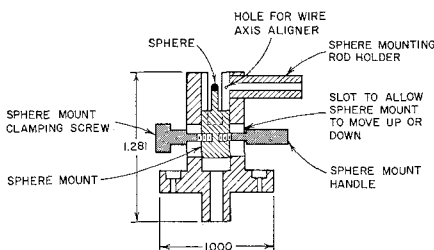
Construction of aligning jig for mounting crystal along [110] axis.
